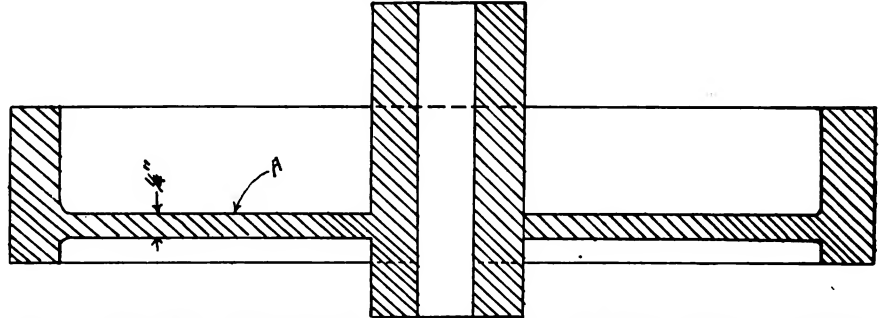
SECTIONAL VIEW OF TRANSMISSION GEAR. INCORRECT DESIGN TO PREVENT WARPING IN HARDENING
